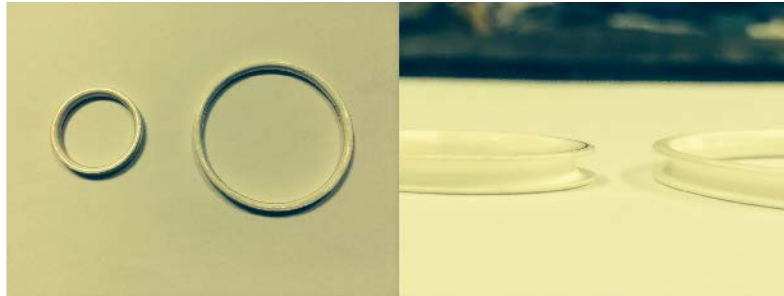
Reactor Assembly High Temperature Metal Seals Top and Side Views.
